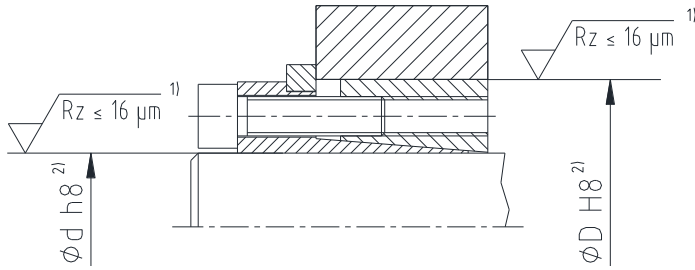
Tolerances and surfaces (example: CLAMPEX® KTR 201)
